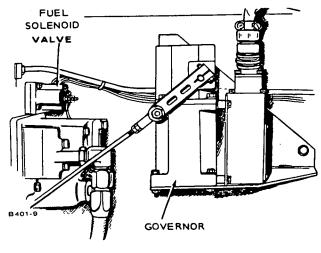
FUEL SOLENOID VALVE LOCATION
